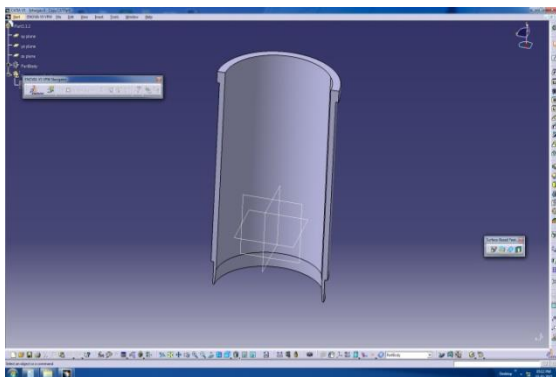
SECTIONAL VIEW OF CYLINDER LINER
